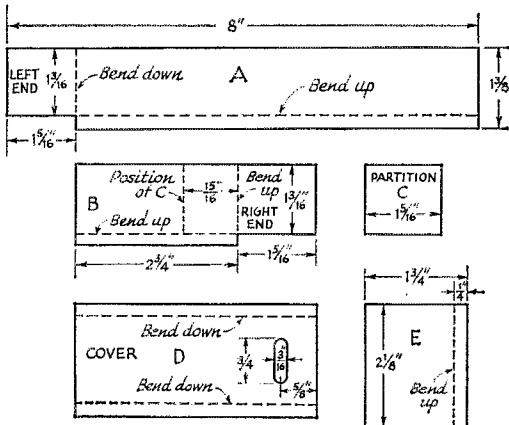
Details of the shielding used in the 2-meter converter. Material is 22-gage sheet brass, silver-plated. Plating can be done with silver nitrate powder sold under the trade name, "Cool Amp," and a damp cloth. Referring to Fig. 3, Side A comprises the left end and long side of the assembly (lower portion in the picture). Side B is the upper side and right end. C is the partition, D the cover (not shown in the picture), and E the partition that separates the power supply from the r.f. portion of the converter. Its edge is just visible, between the filter capacitor and L_7 and J_2 . The hole at the right side of D permits adjustment of turn spacing and position of L_3 , L_4 and L_8 when cover is in place.
